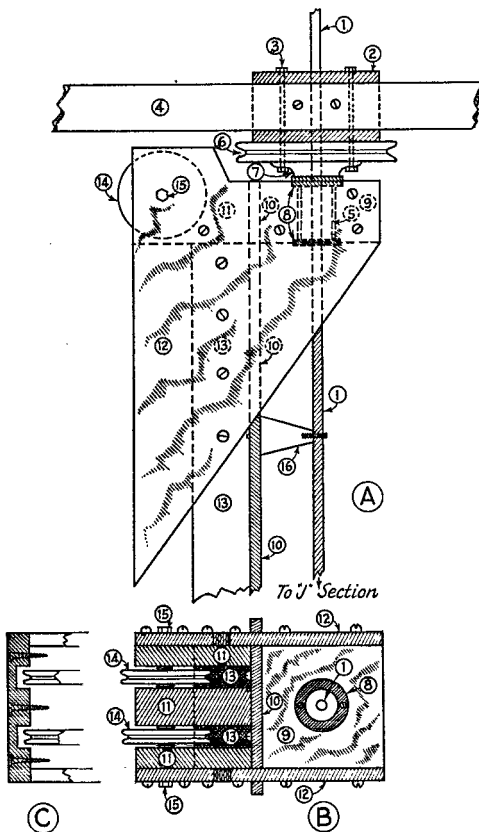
Detailed sketches of the rotating head of W1GAG's 112-Mc. directional antenna. A and B are side and top views, respectively. Similar numbers identify similar parts in Fig. 5.
